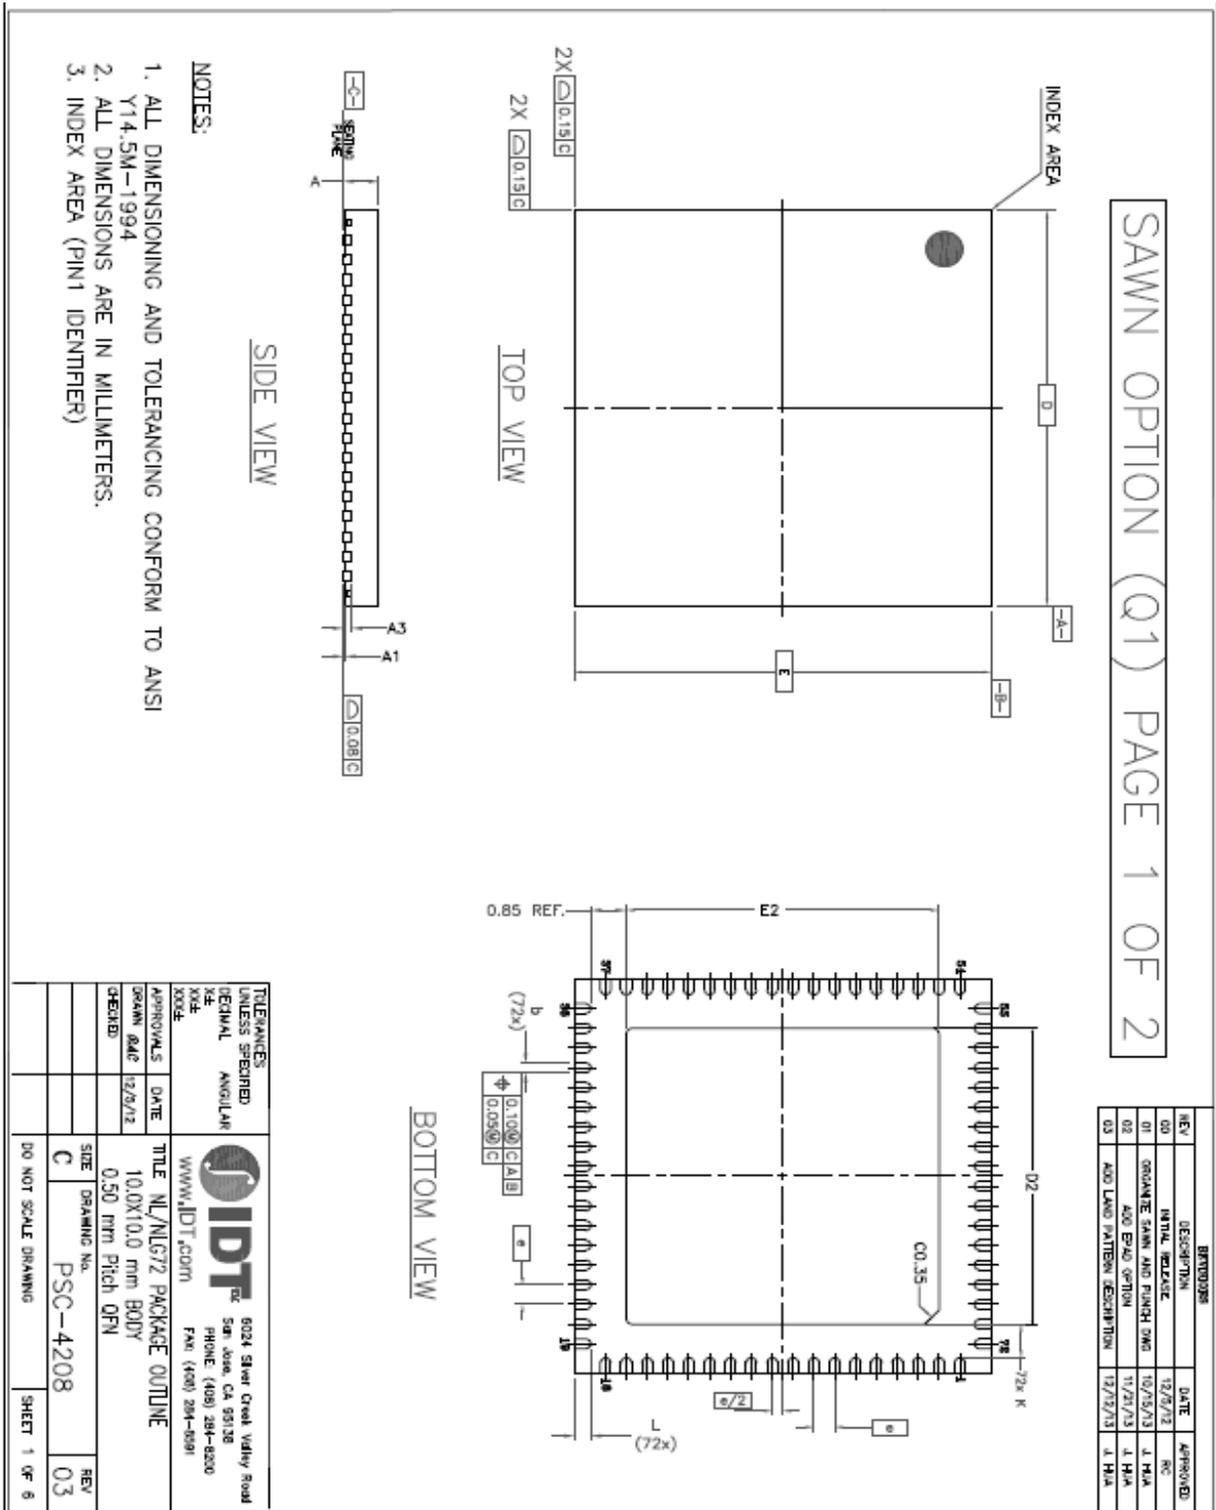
72-Pin QFN Package Outline Page 1 (SAWN Option)
